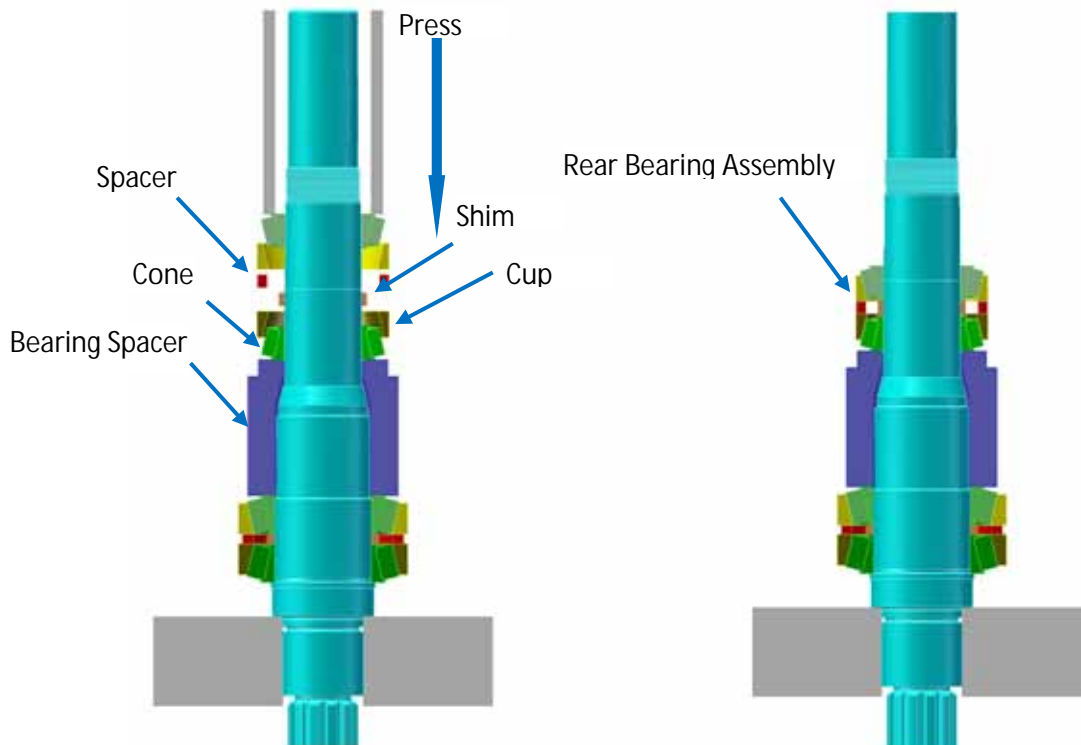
Pressing Upper Bearing Assembly onto Shaft
